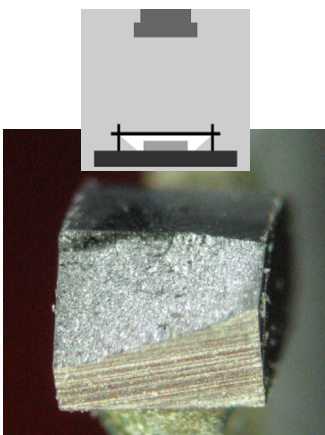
shows a cutting tooth of a carbide tipped saw blade.
